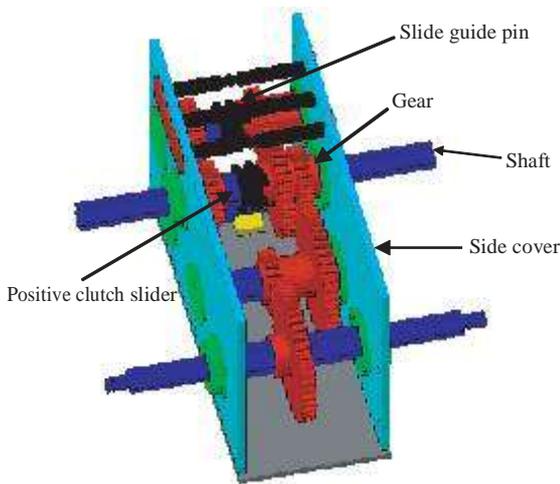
AutoCAD drawing of gearbox of BRR I developed reaper.
